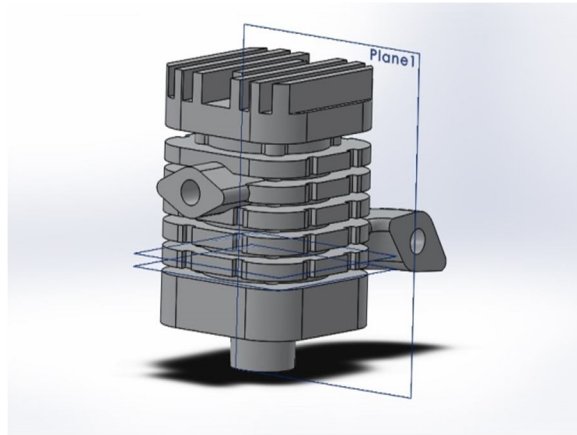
Fins 3D solidworks model with aluminium alloy 6065 with groove
